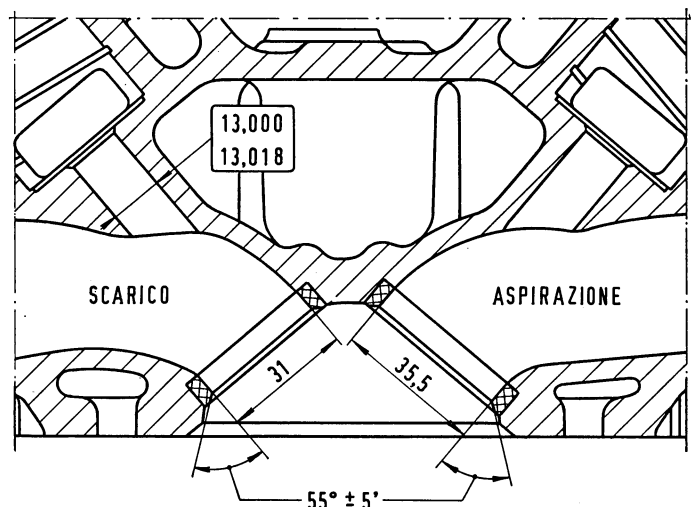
Critical dimensions (in mm) and angles of 118 B.000 engine valve seats on head.
